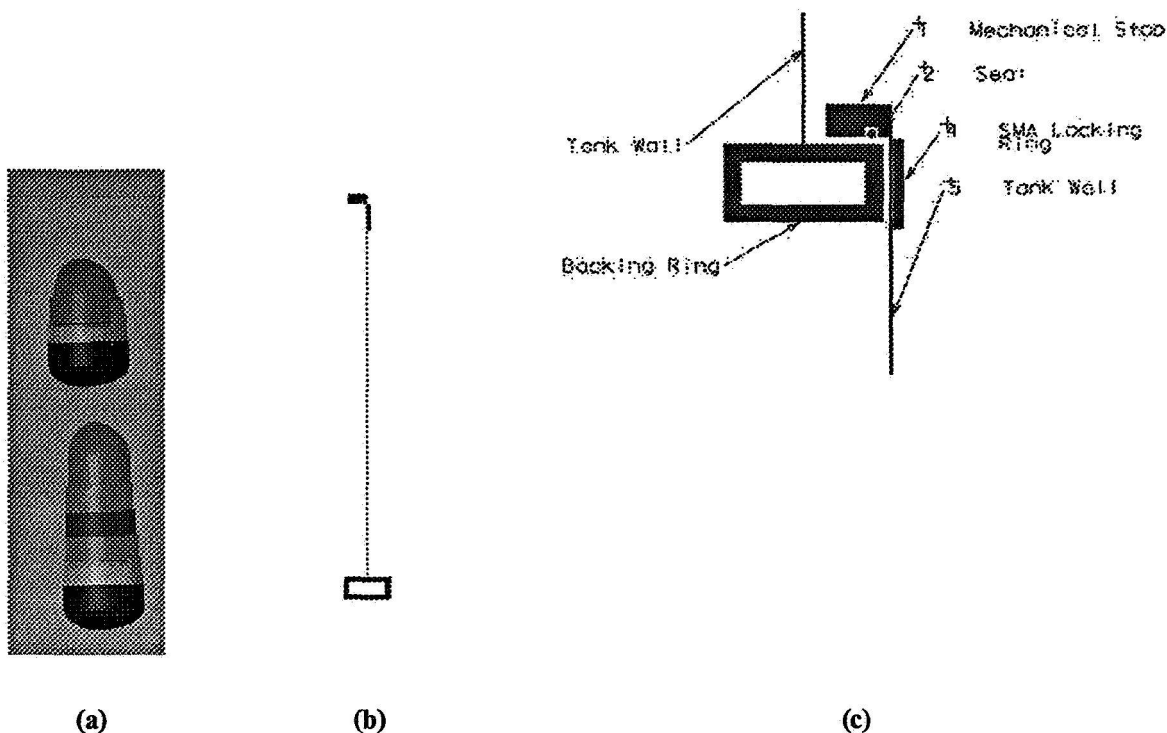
Schematic of telescoping tank concept with SMA locking ring joint (a) deployed and undeeployed positions; (b) cross section of typical segment (c) detail of joint geometry
